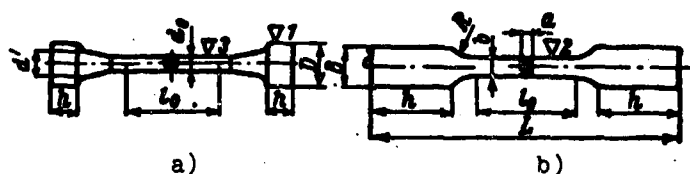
Standard samples for tensile test. a) cylindrical, b) flat, h - length of head, a - thickness of flat sample, b - width of flat sample, l_0 - length of working or design part of sample, L - overall length of sample.
